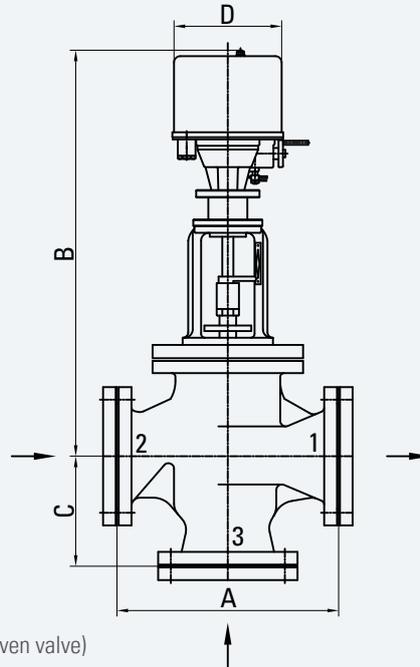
Lube oil temperature control valve LR1 (electric driven valve)
